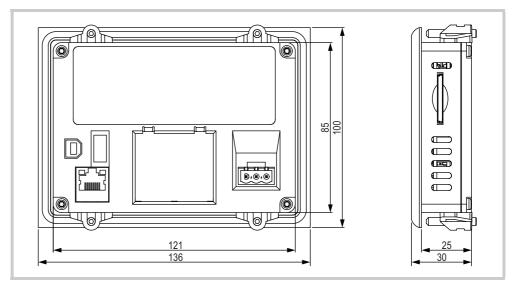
Mechanical dimensions of the 3.5" devices in mm
